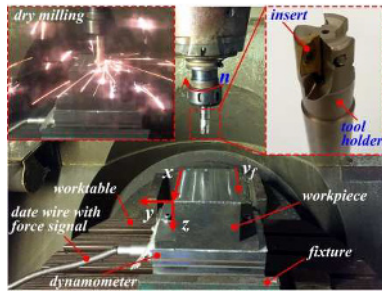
Experimental design of high-speed dry milling of AISI 4340 steel.
